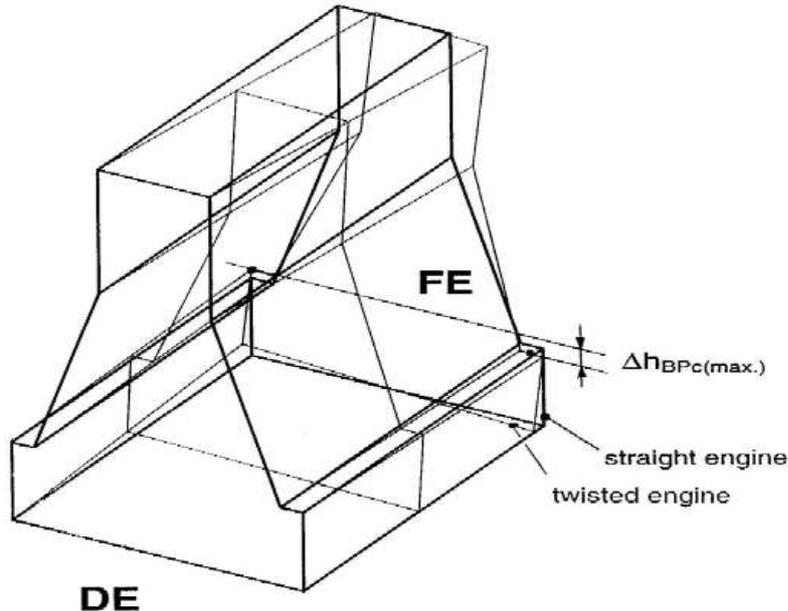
Parallelism of engine drive end (DE) to engine free end (FE)
